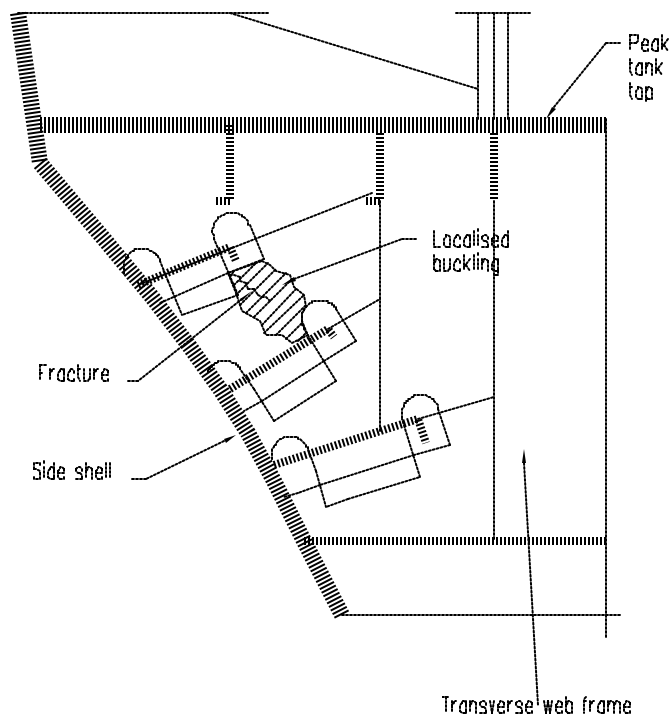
Fractured stringer end connection in way of the parabolic bow structure.
